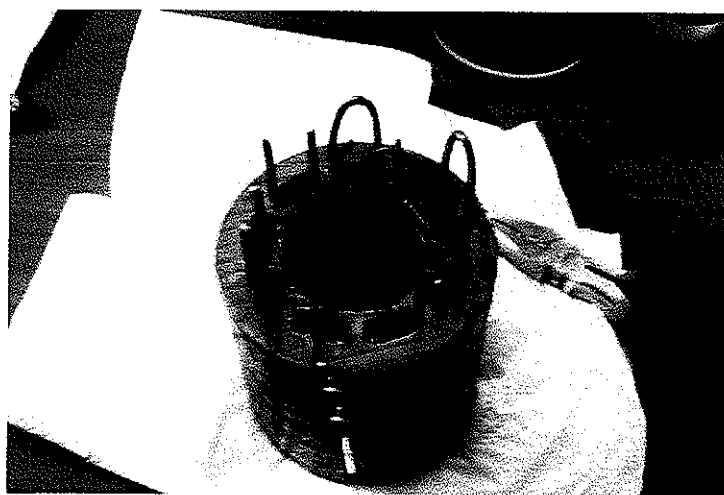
(Stator assembly, used epoxy and clothes hanger for alignment)
